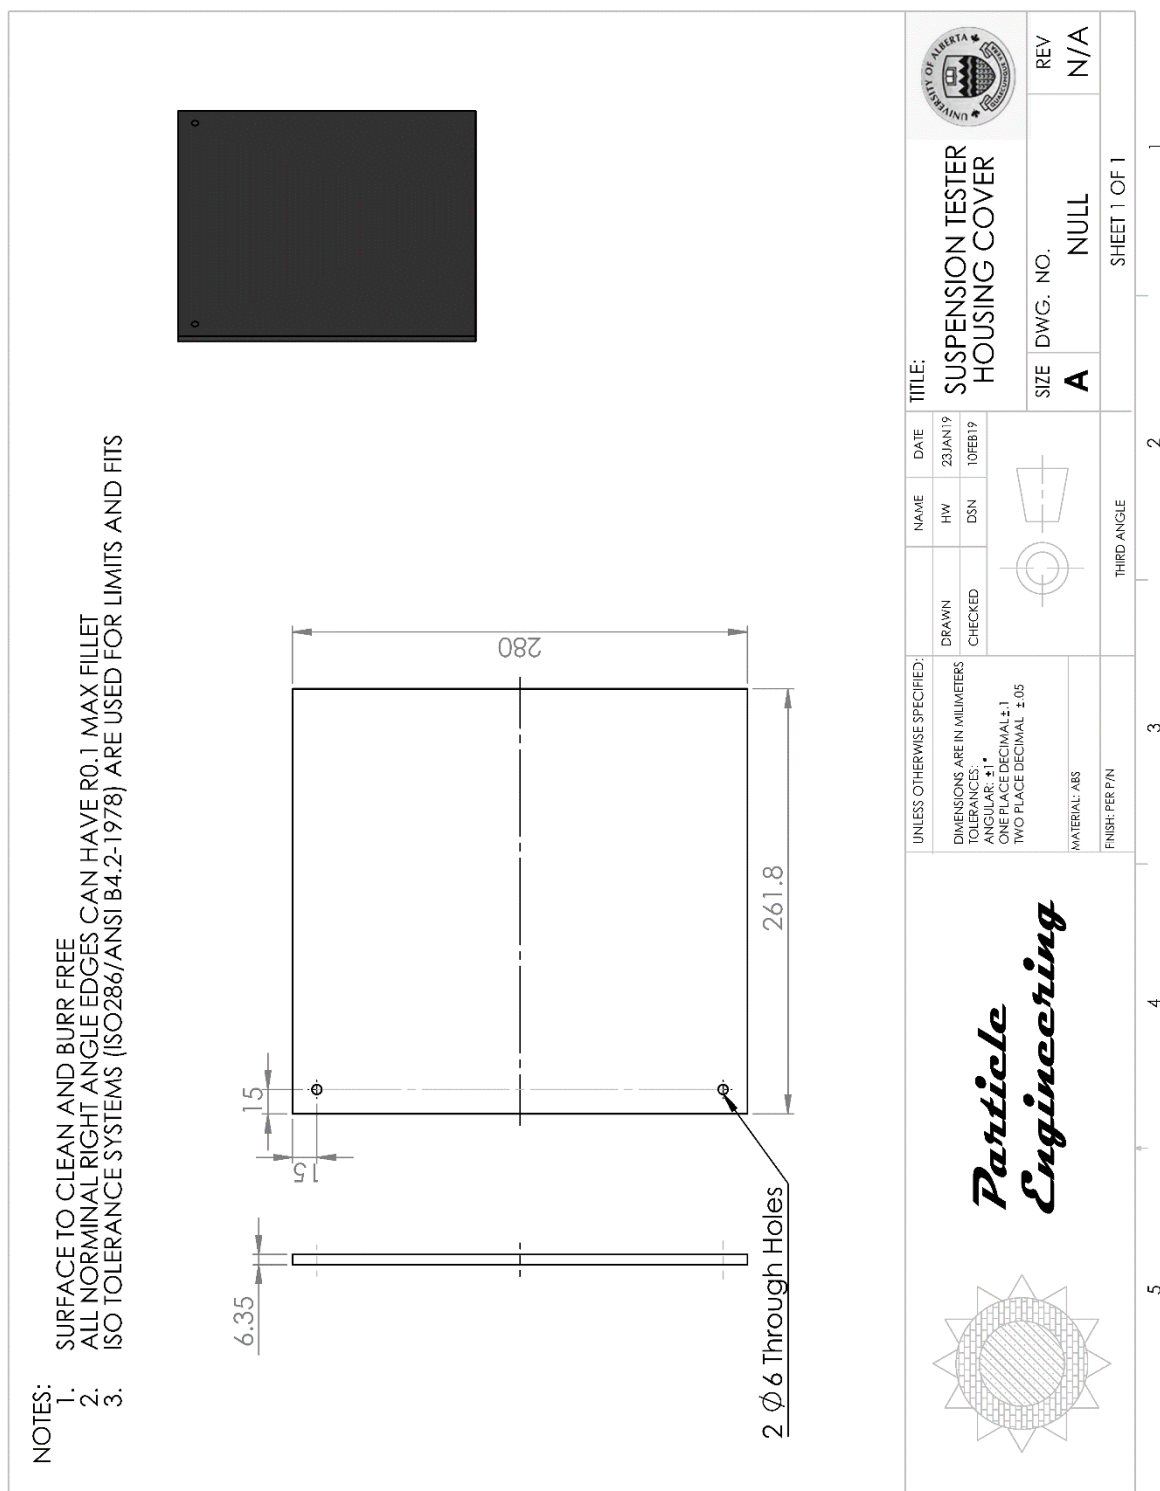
CAD drawing for the top cover of the light-proof sample chamber.
